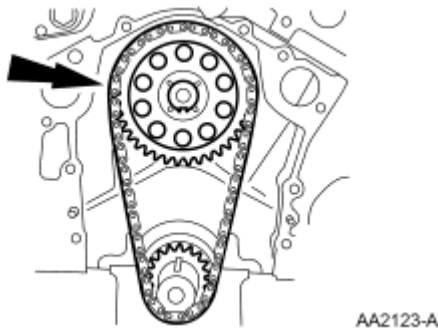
Locating Timing Chain & Camshaft Sprocket
